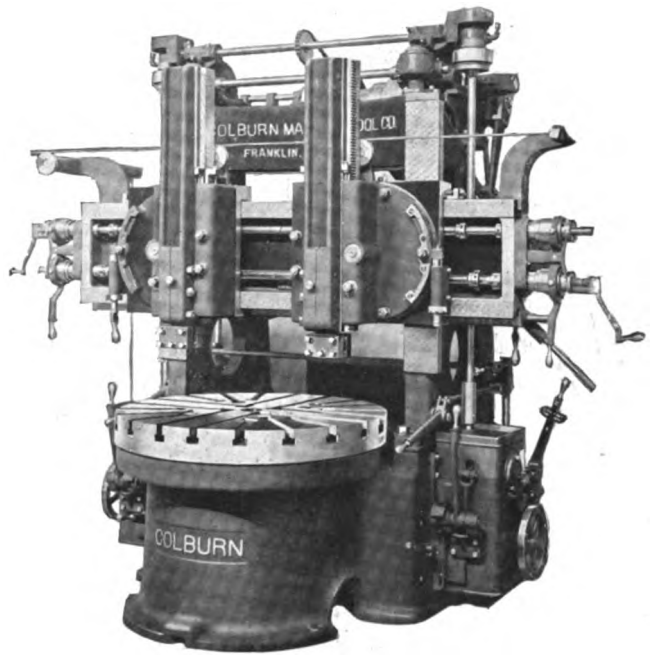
48-in. (1 219 mm.) VERTICAL BORING AND TURNING MILL WITH TWO SWIVEL HEADS AND PLAIN TABLE
